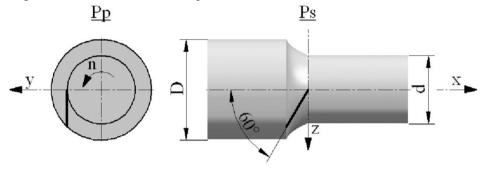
The principle of longitudinal turning using single - edge tool with straight cutting edge for $\lambda s = 60^{\circ}$.
